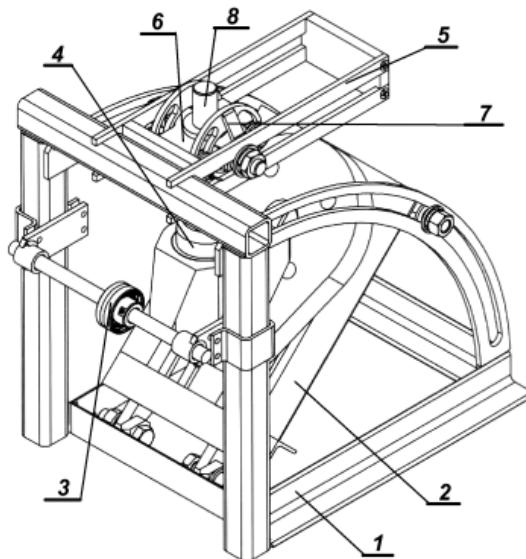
A model of a laboratory stand for examining resistance of the tools rotation in holders
